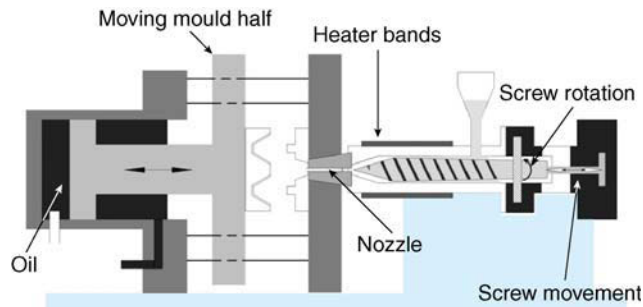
Schematic view of a hydraulic injection molding machine with its main components [7].
